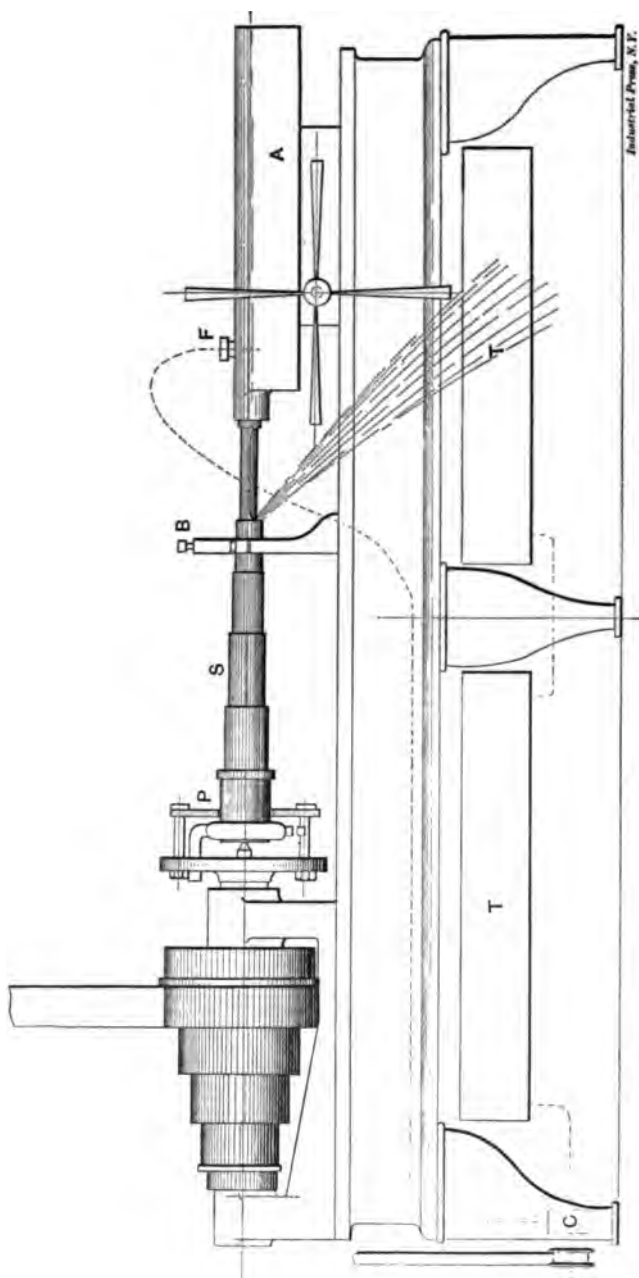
Turret Lathe Arranged for Deep Hole Drilling
